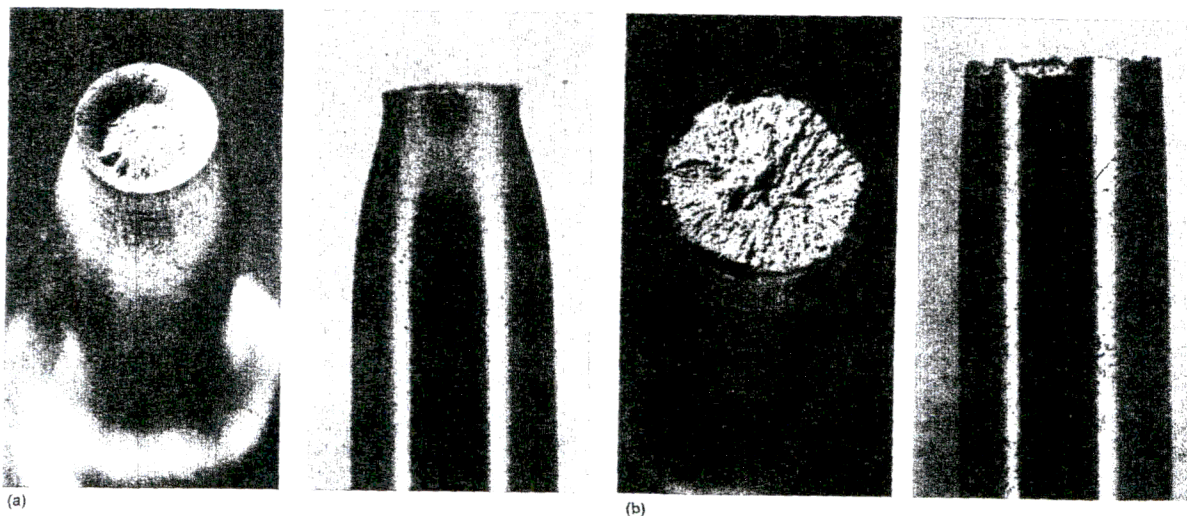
Appearance of (a) ductile and (b) brittle tensile fractures in unnotched cylindrical specimens. Courtesy of George Vander Voort
